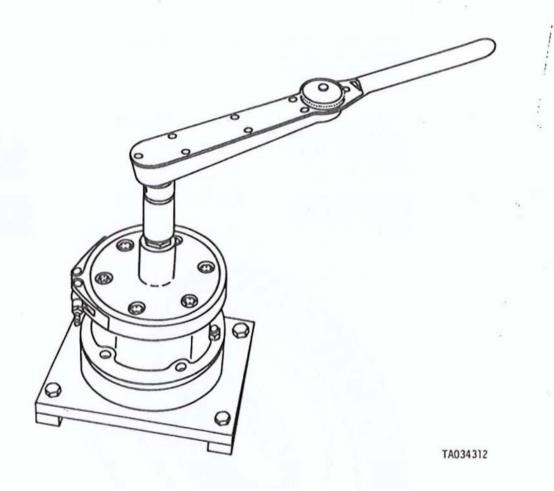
Special fixture assembly-generator gear slip clutch torque checking.
